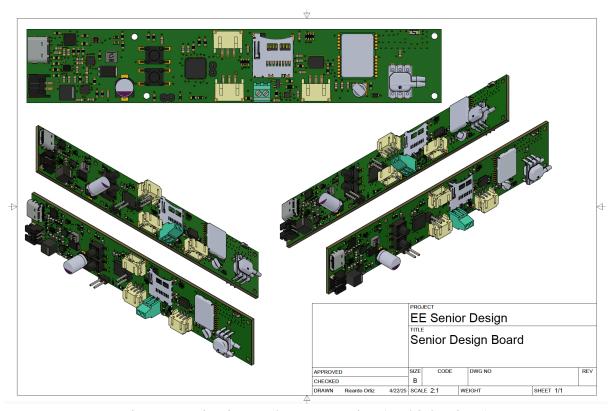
Circuit Board CAD Drawing (Multiple Views)
